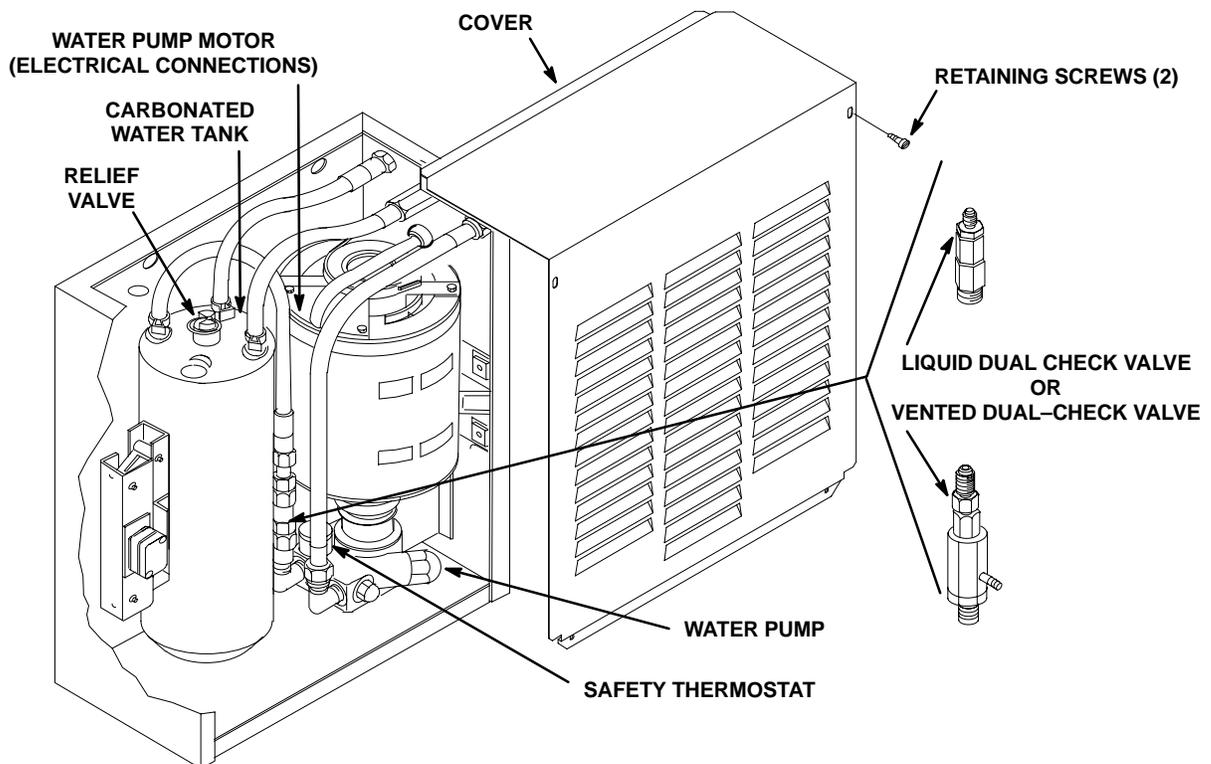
CARBONATOR ASSEMBLY COMPONENTS
